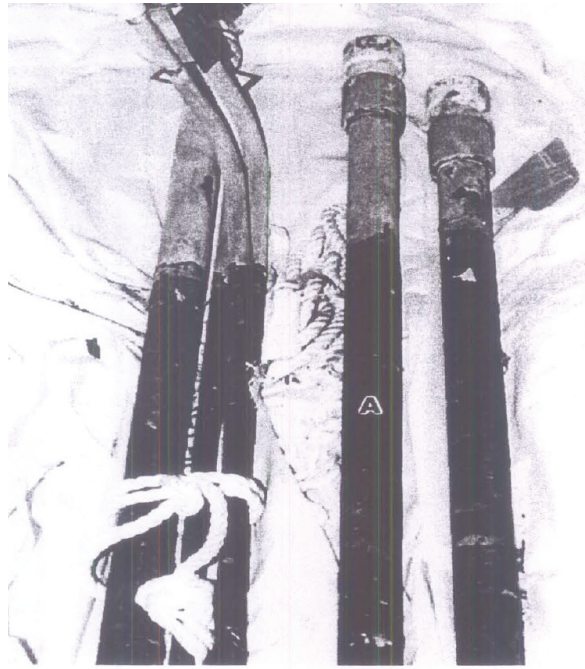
Leak detection box dip tubes; Section marked 'A' was submerged in concrete.
